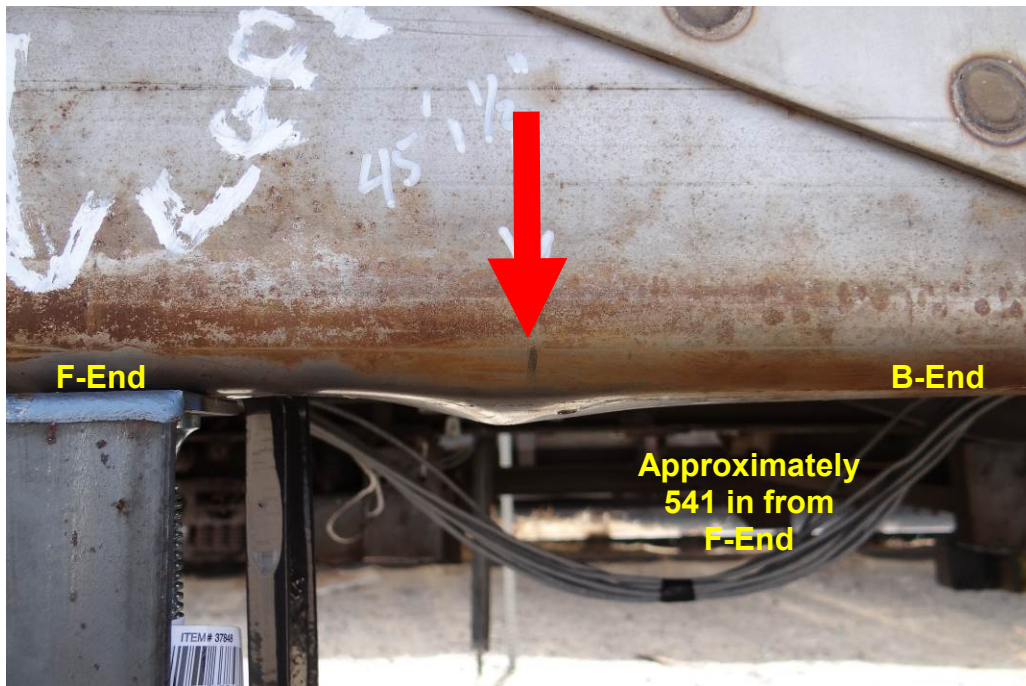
Damage on Left Side Sill Following 800,000-pound Load Test
